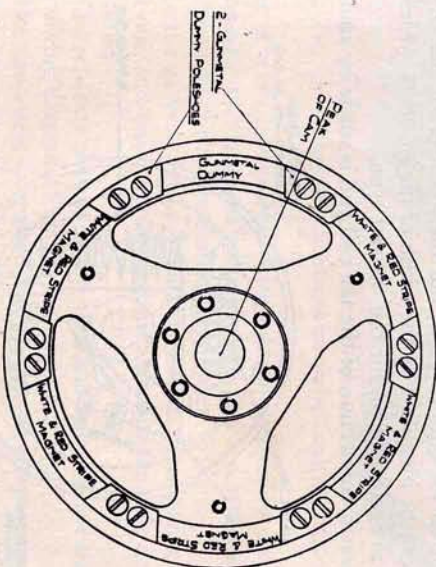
FLYWHEEL ASSEMBLY OF SIX-POLE 24-WATT MAGNETO.
